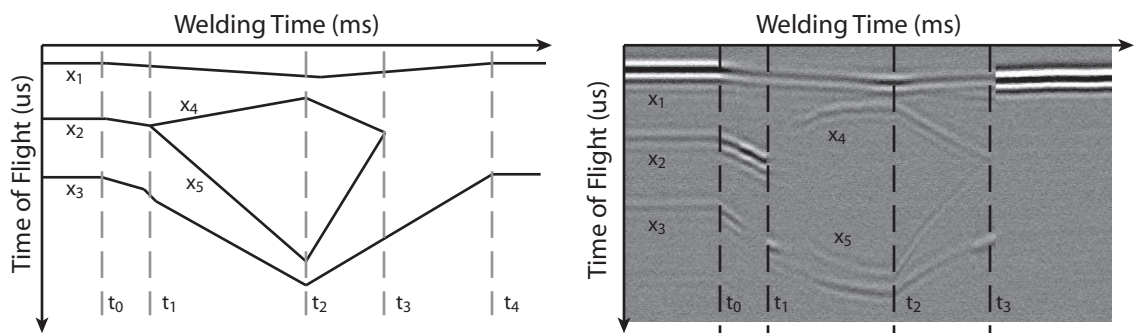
The M-scan acquired by successive A-scans during welding: a) Schematic expectation of reflections. b) Actual M-scan acquired in real-time during welding.
